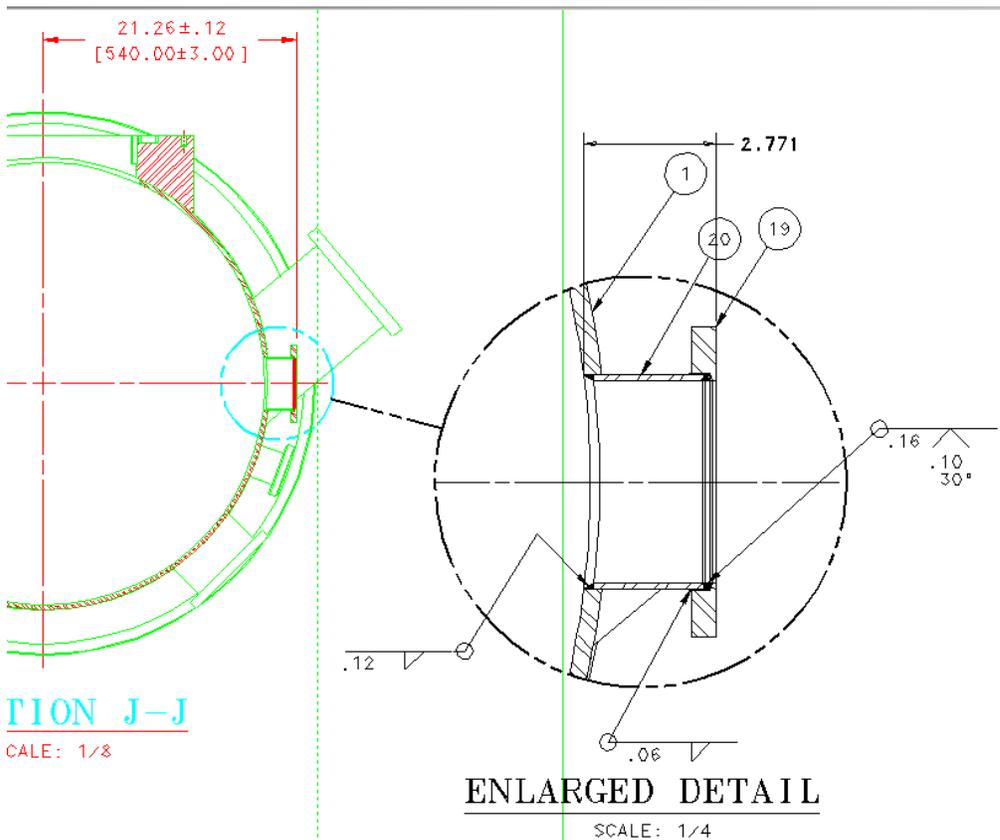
, The 2D view of the port #20 from drawing ME-443027-2
